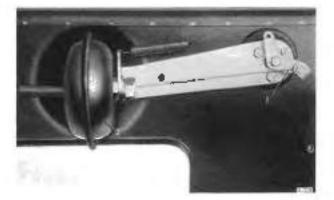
Datterfly valve actuating mechanisms ACTUATING RECHANISM 3. VACUUM VALVE
